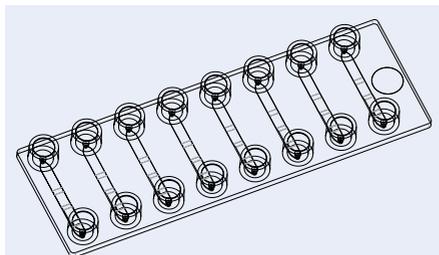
Schematic drawing of cuvette chip – Fluidic 527
